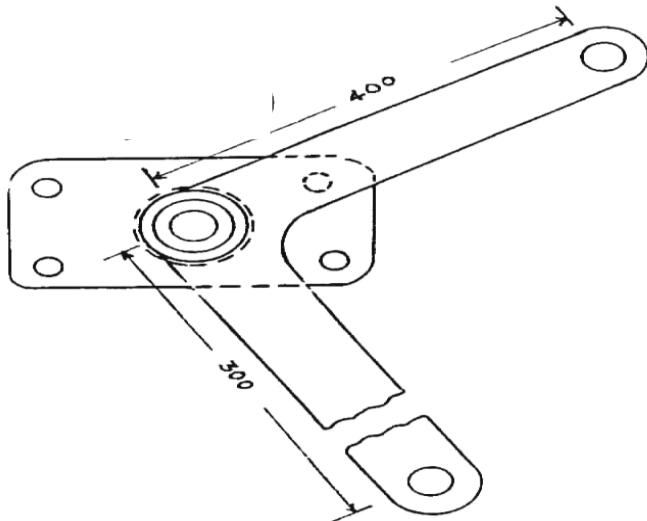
(e) HORIZONTAL CRANK (SA 3415)
